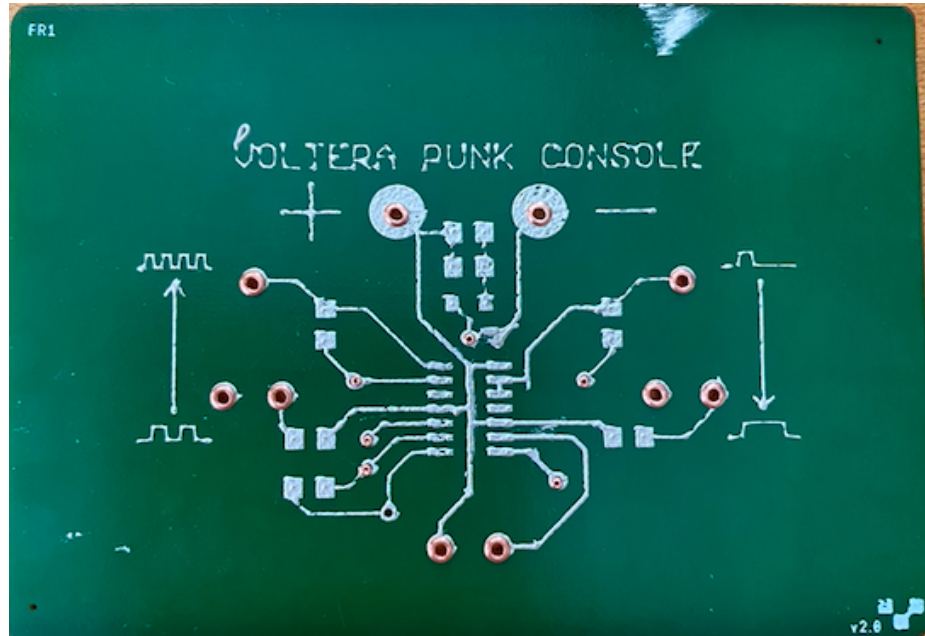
Completed inking and inserted rivets which are the copper colored rings.
